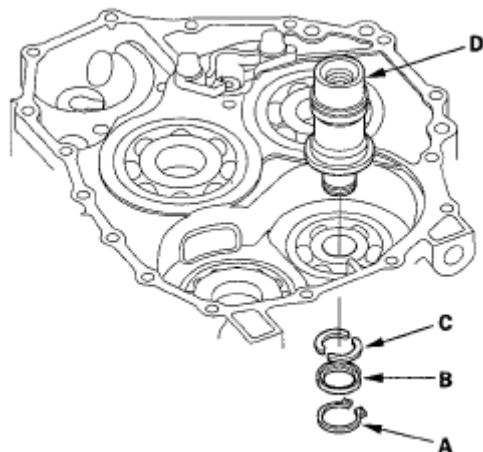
Identifying Snap Ring, Cotter Retainer, Cotters And Idler Gear Shaft
